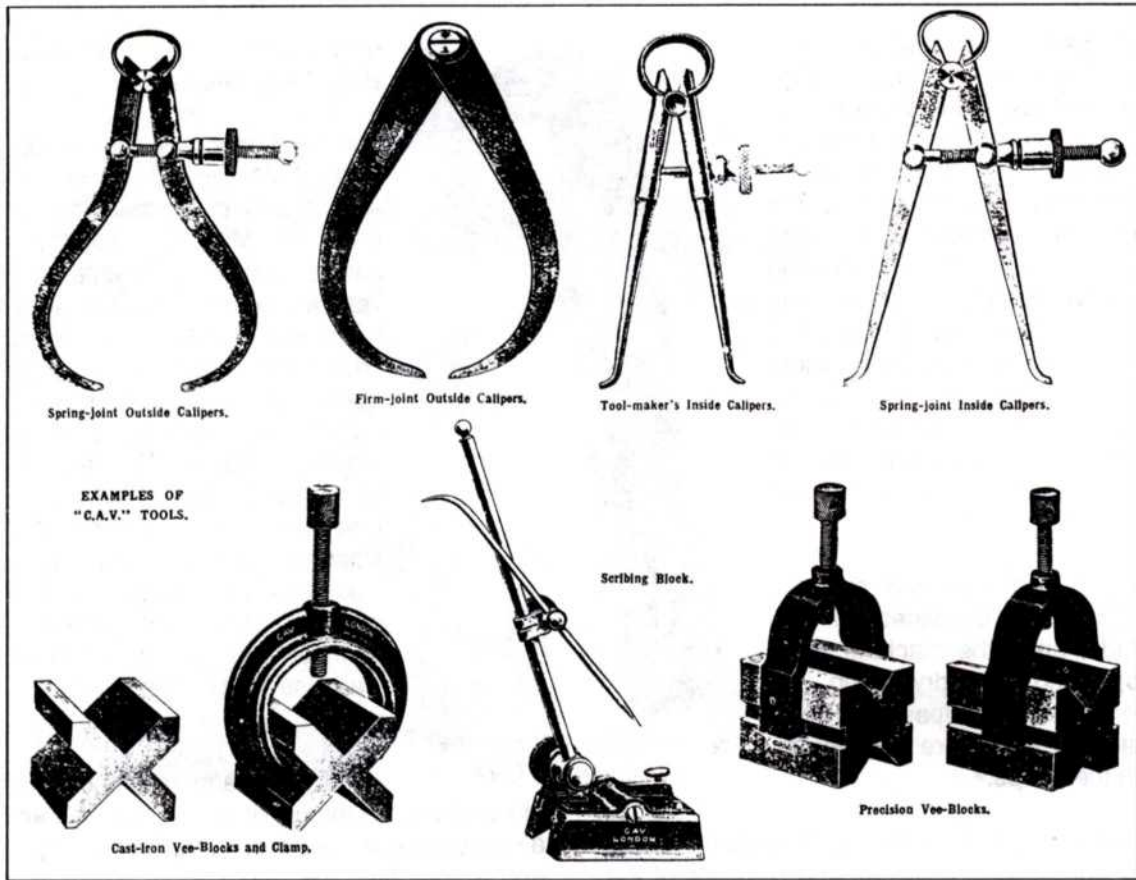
Types of hand tools manufactured by CAV (*The Model Engineer* 13 April 1922)
